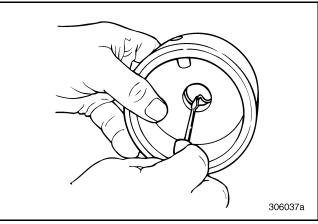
Removing Teflon<sup>®</sup> Seal and O-Ring Expander
